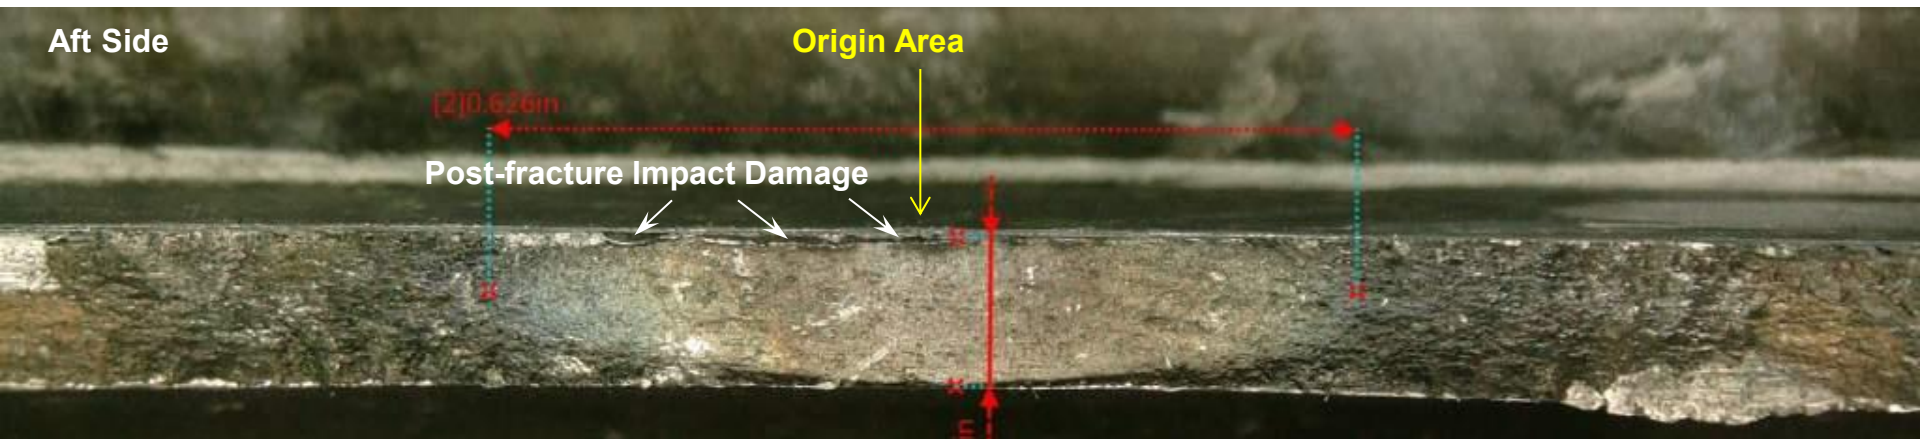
Optical view of a lab-cut section of the outboard liberated piece showing that the fatigue fracture was located approximately 0.95 inch inboard of the slot bottom in the thinnest portion of the web near the rim (better view shown in metallographic mount).
